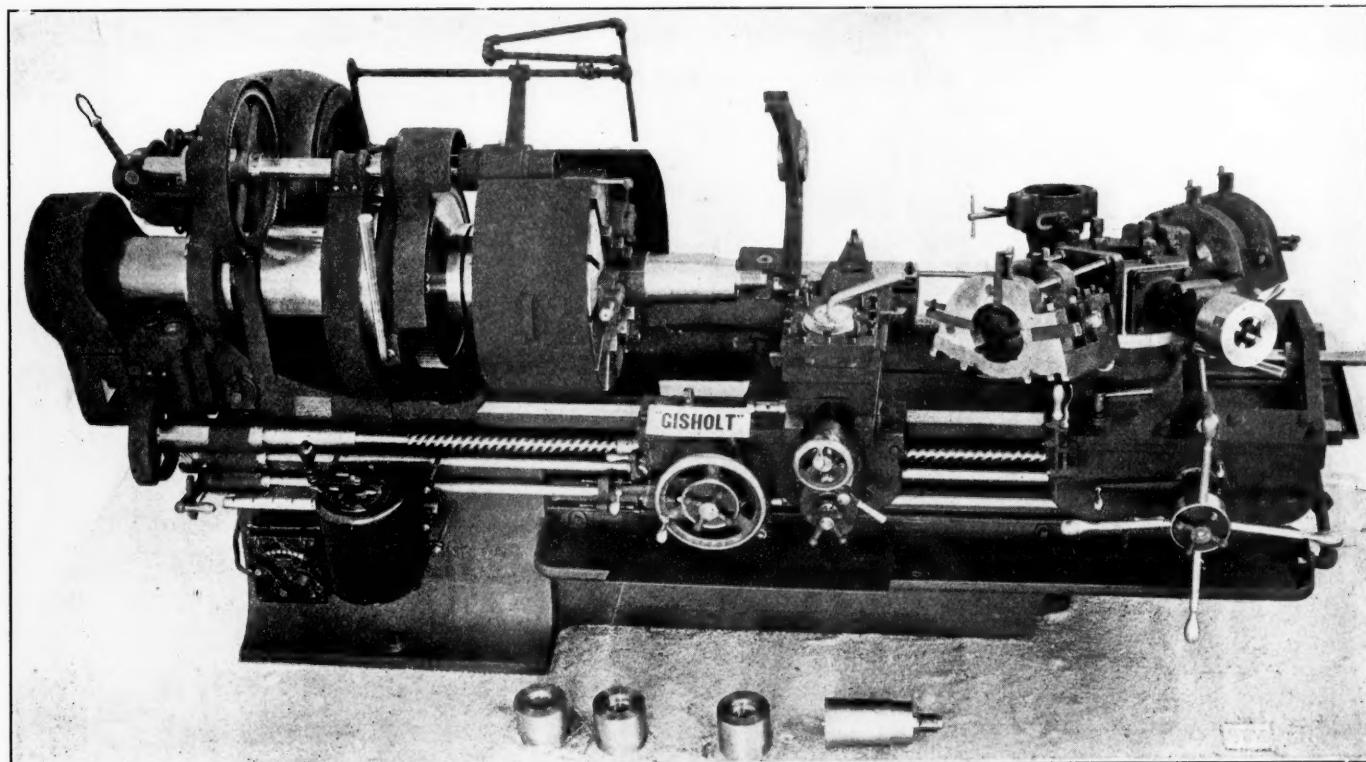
Gisholt 24-in. Lathe with $6\frac{1}{4}$ in. Hole.
